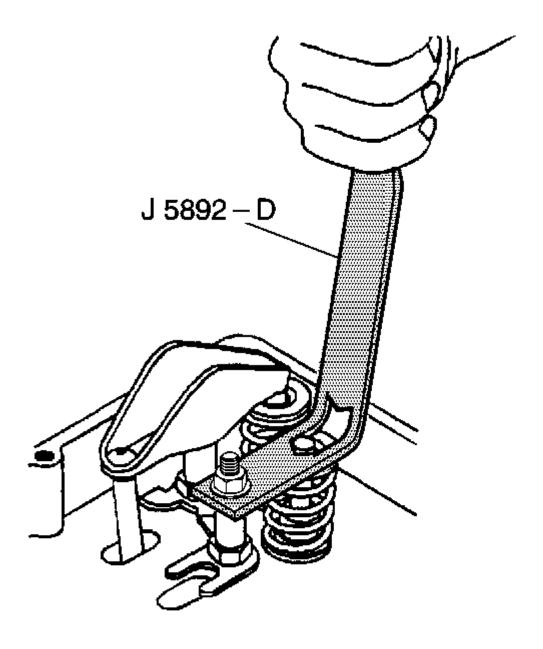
Compressing Valve Spring Using J 5892-D Courtesy of GENERAL MOTORS CORP.
